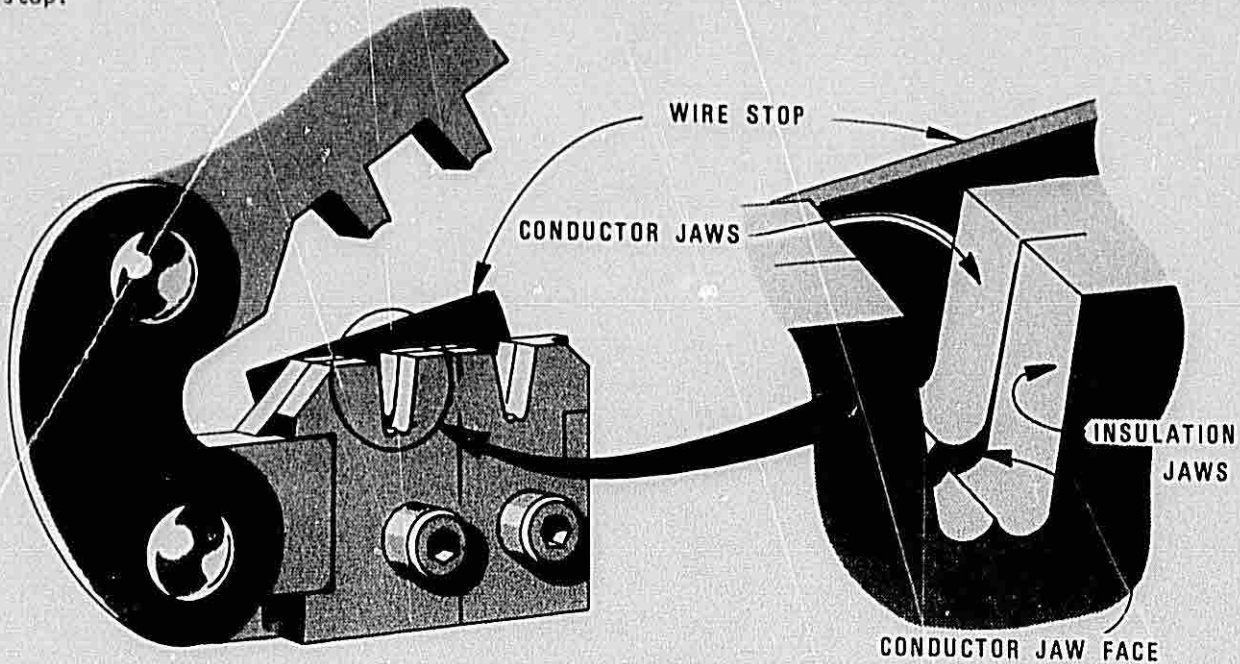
SOLDERLESS TERMINALS AND TOOLS
